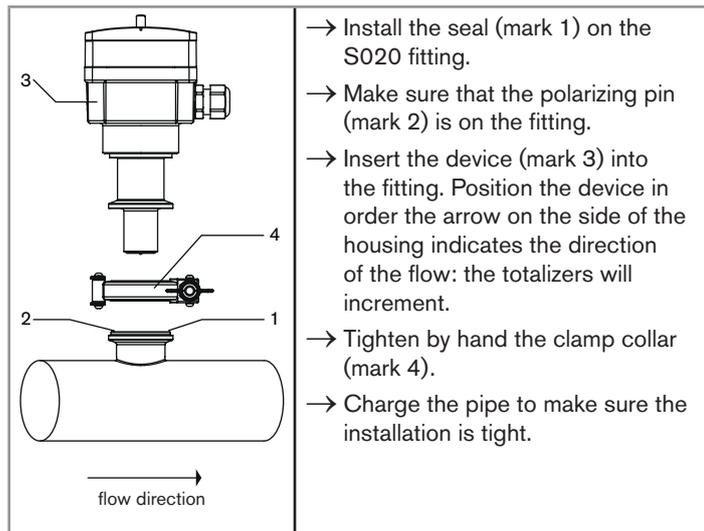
Installation into the pipe of a 8041 with a clamp connection
